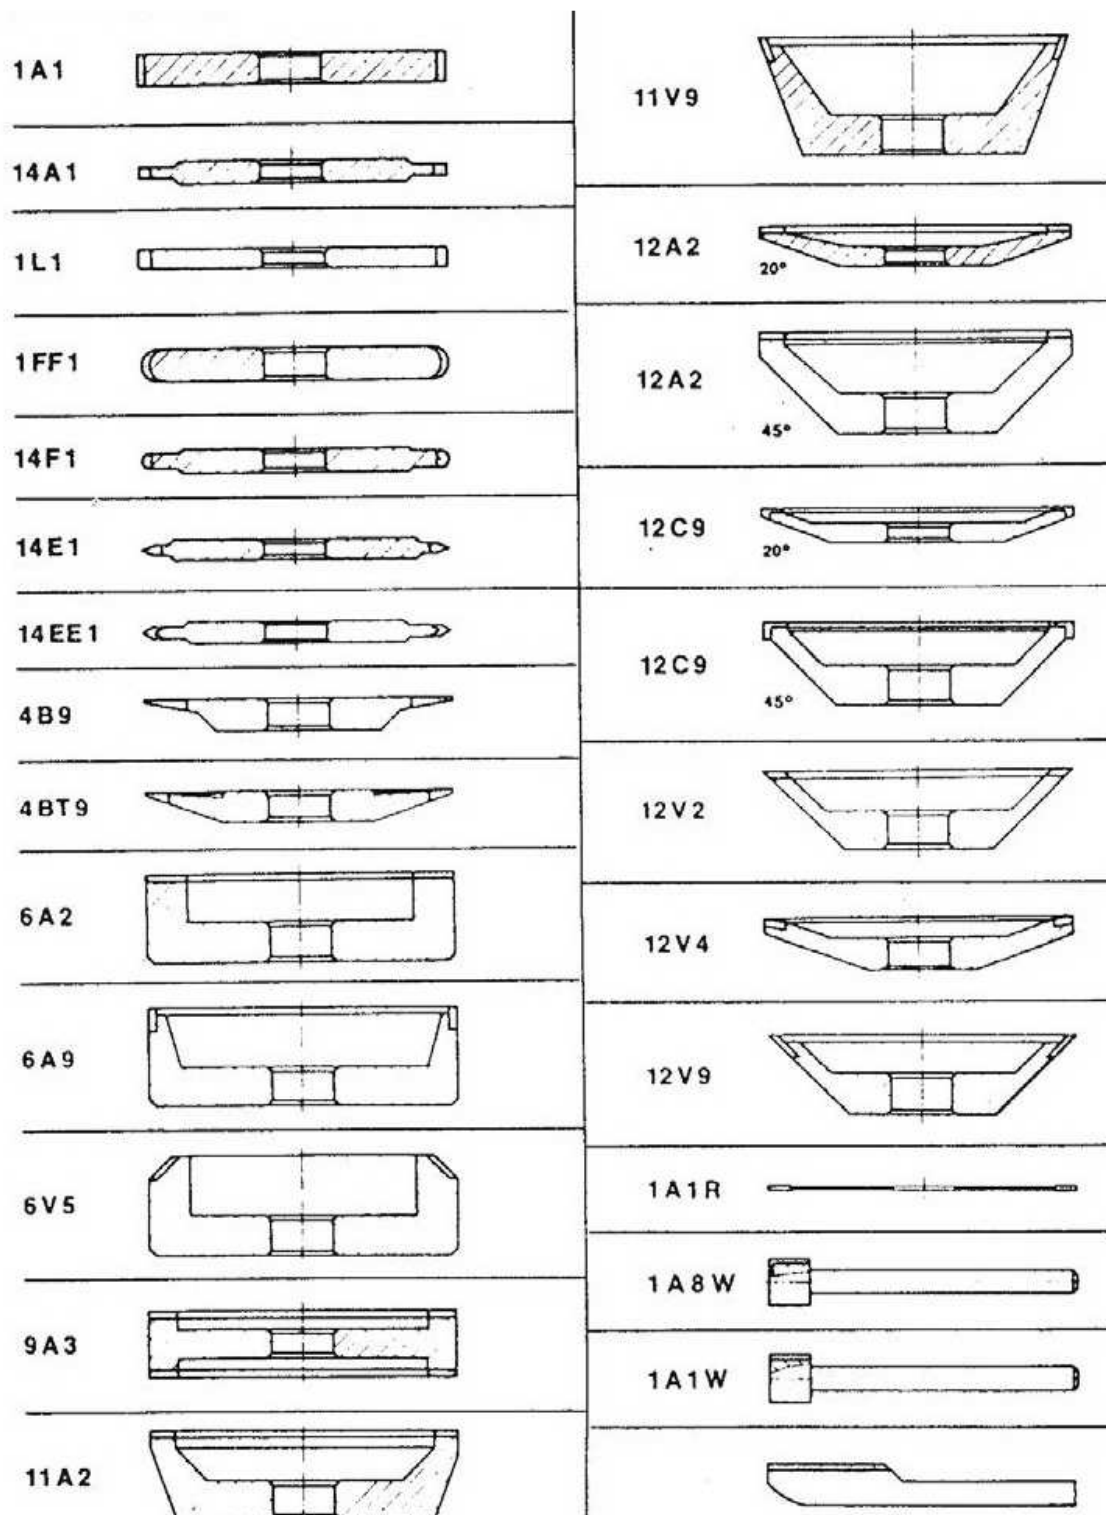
Standard wheel configuration for super abrasive wheel
